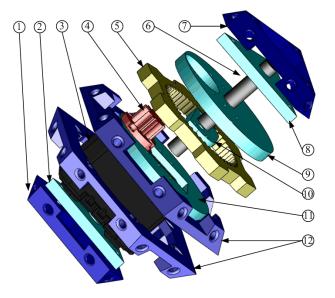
Exploded view of the robot's CAD model. Where 1, 7 and 12 are frames; 2 is a motor holder; 3 is a servo motor; 4 and 5 are external and internal gears respectively; 6 is the rotation axle; 8 is the holder of the axle; 9 and 11 are gear locaters; 10 serves as an axle locater and holder.
